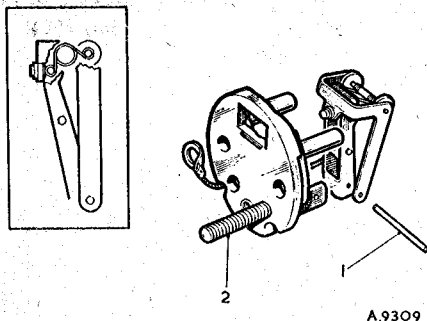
Fitting the rocker assembly to the pedestal. (Inset) the correct position of the centre toggle spring
